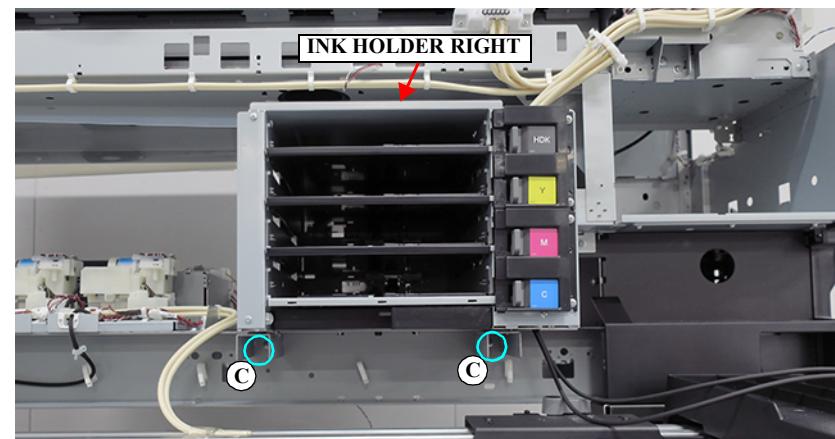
Removing the INK HOLDER RIGHT (7)
